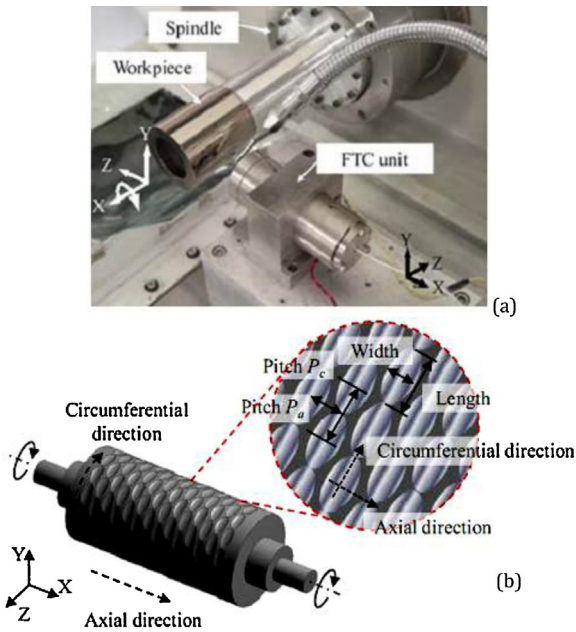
Microlens on drum roller fabricated by FTC [69].
